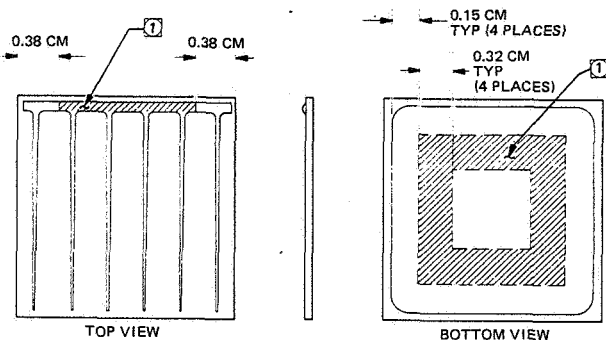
Definition of Area for Pull-Test Tab Soldering (Ref. 11.5-1)
